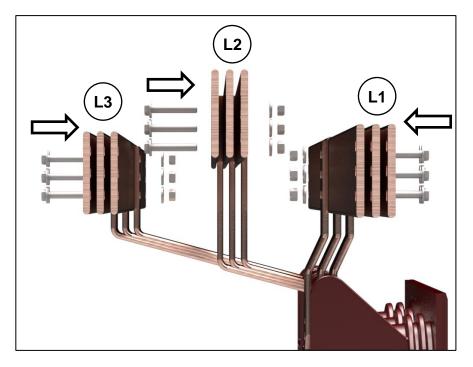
Side view of 3150 A / 4000 A busbar assembly, feeder 3150 A / 4000 A,  $U_r \leq$  12 kV
